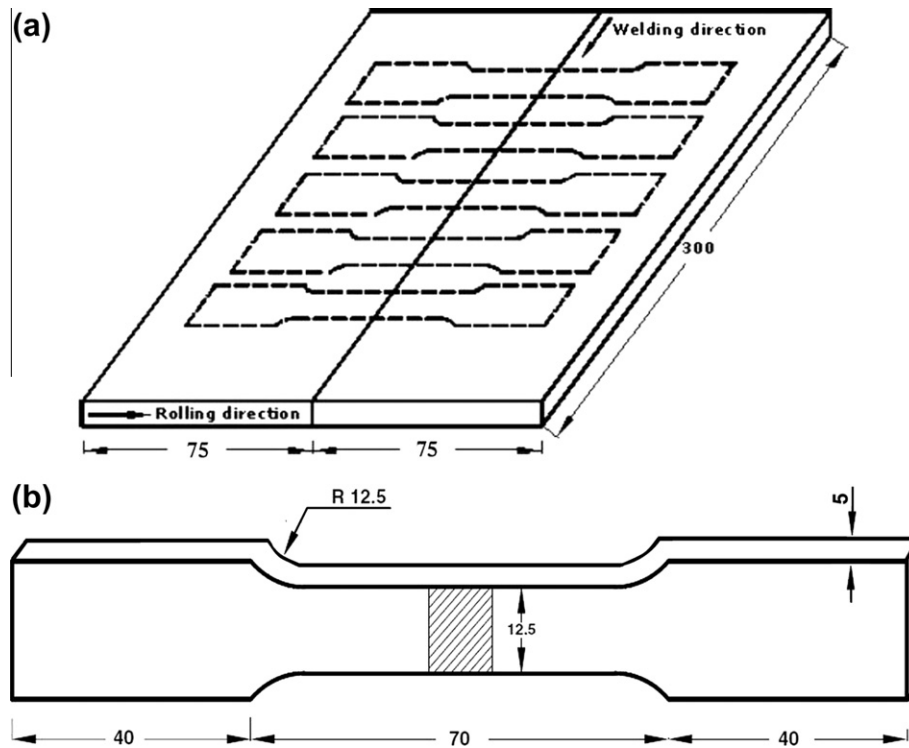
(a) Position of tensile test specimens in the FSWed joints and (b) schematic illustration of the tensile test specimen.
